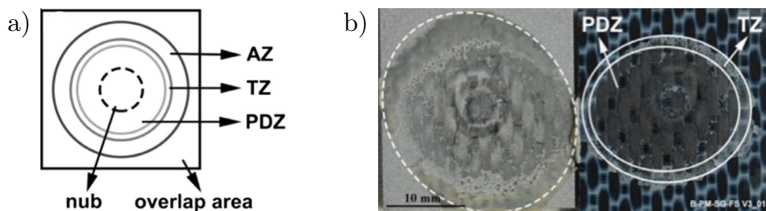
a) Illustration of fracture surface; b) a real fracture.
